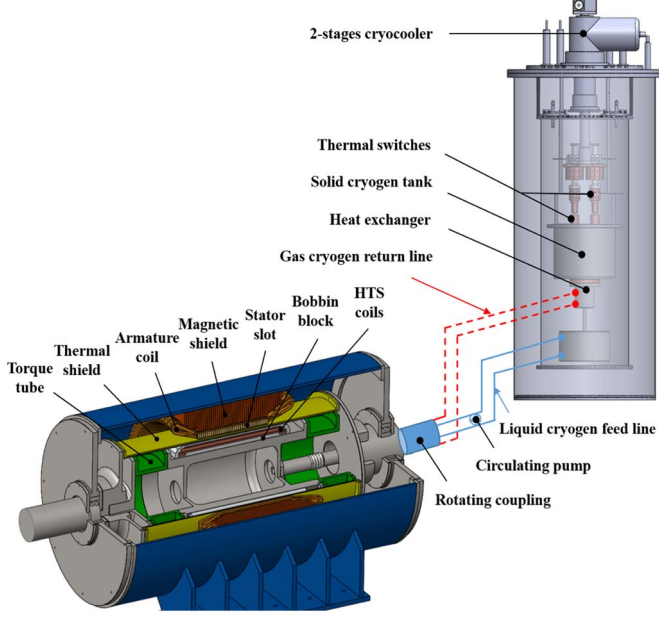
Configuration of the cooling system, and basic schematic view of the HTS rotating machine conceptual design.
